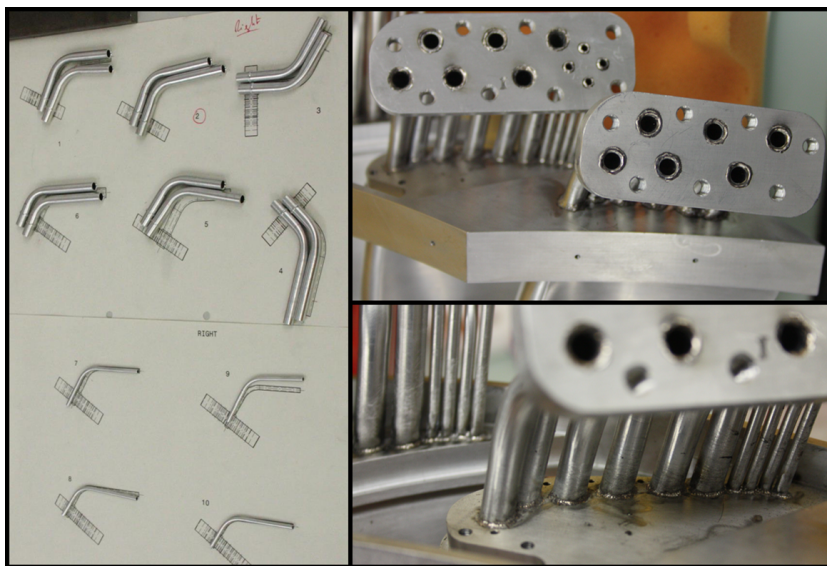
Left - Bended tubes on superposed on top of printed reference shapes. Right top - Welding of the tubes tip to the connector. Right bottom - Laser welding of the tubes to the segment.
